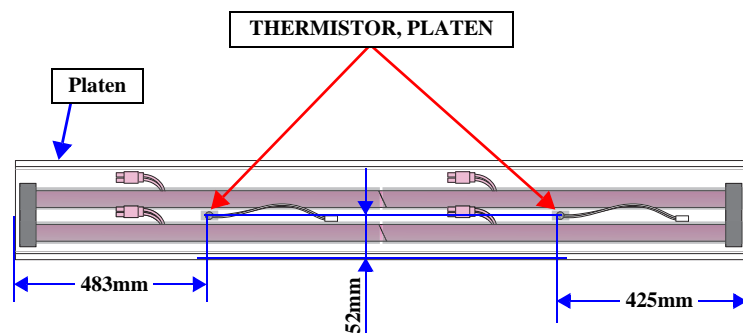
Removing the PLATEN HEATER (64) and THERMISTOR, PLATEN
